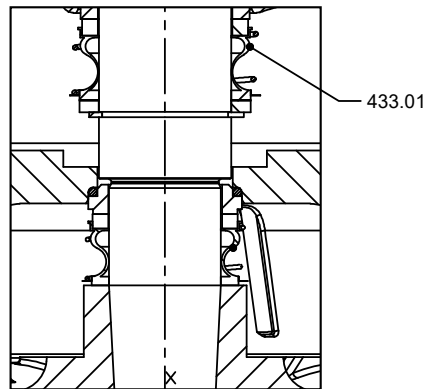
Drive-end mechanical seal (bearing brackets S01 - S07)
